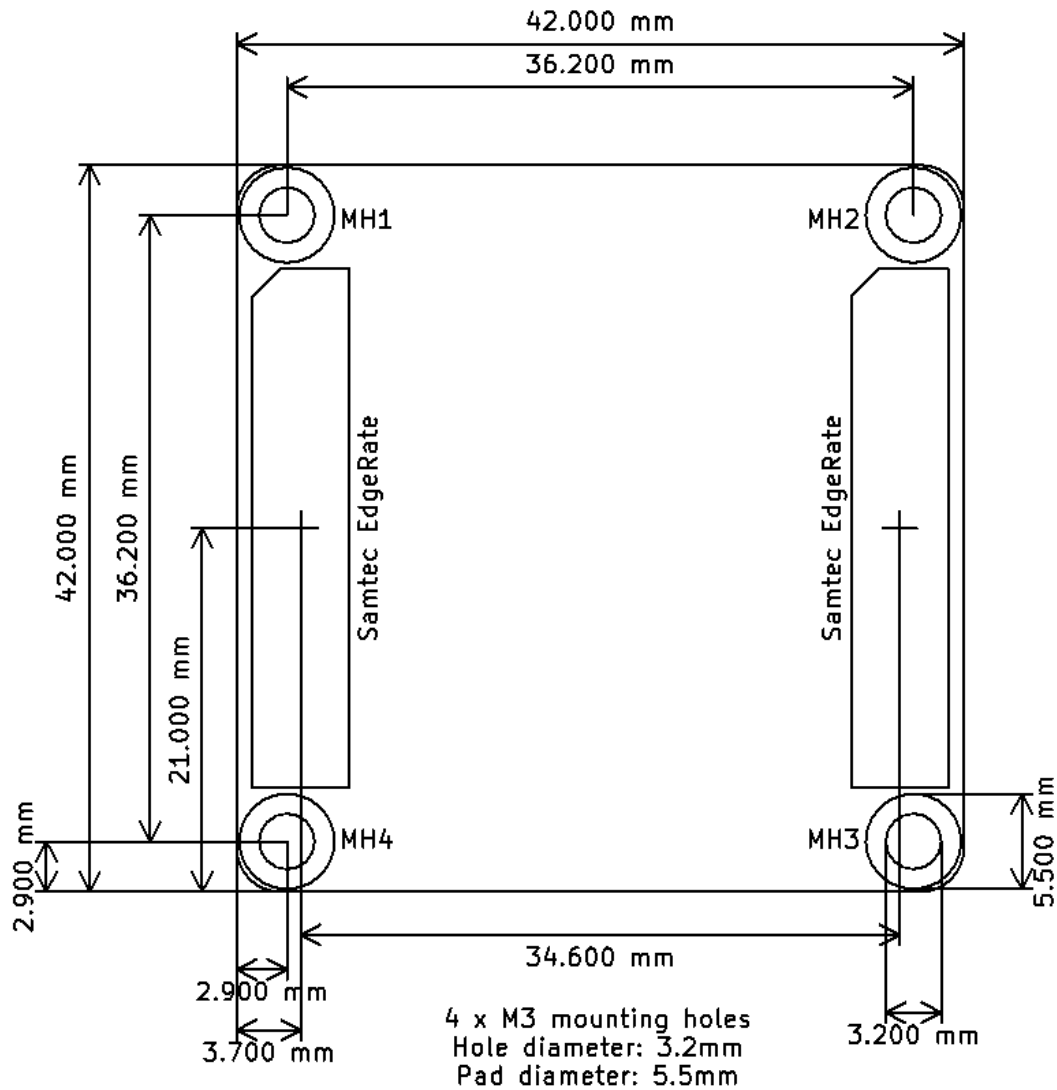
UbiSwitch mechanical drawing, viewed from top down
